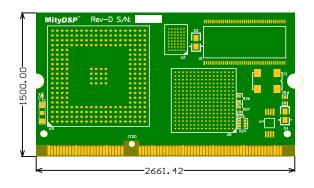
MityDSP & MityDSP-XM Mechanical Drawing
